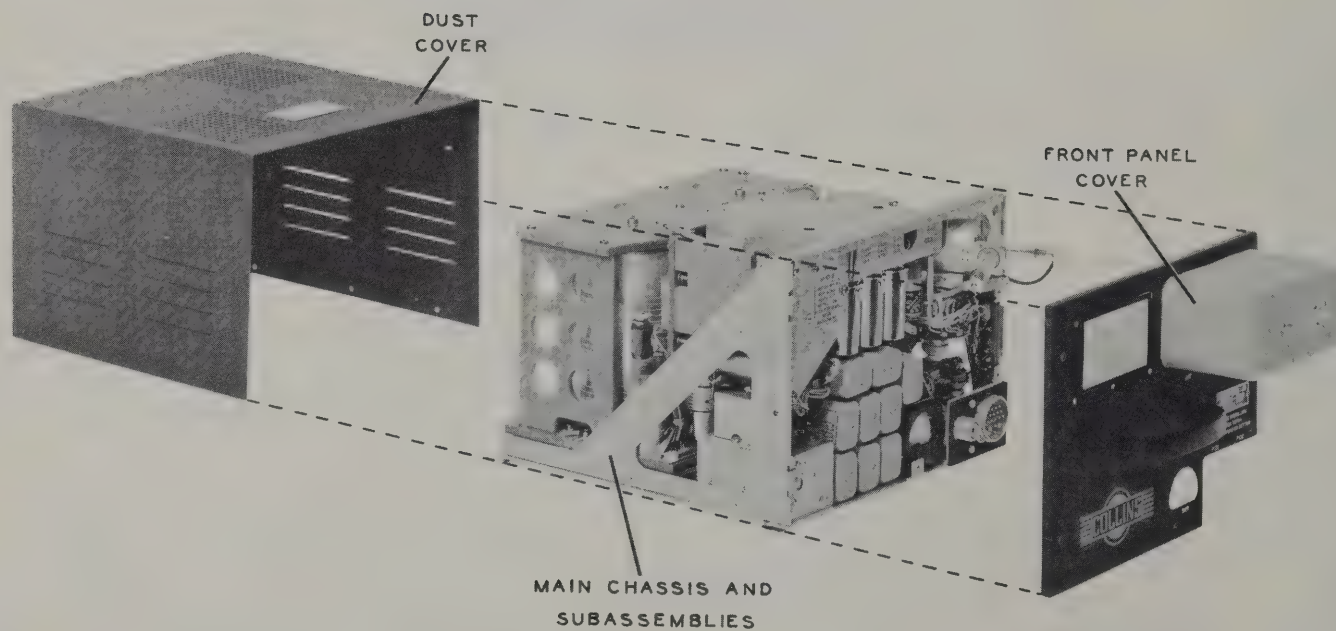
Automatic Antenna Tuner 180L-3 or 180L-3A, Front Panel and Dust Cover Removed
